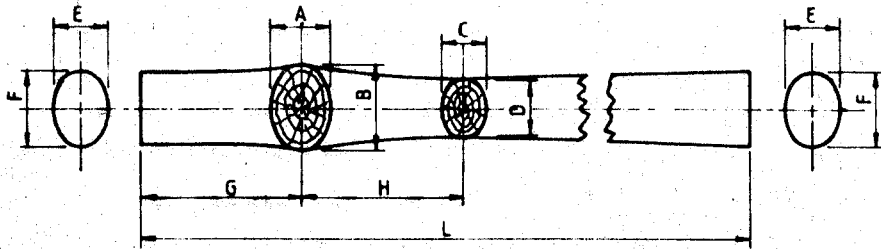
(b) - Dimensions of welder's chipping hammer
